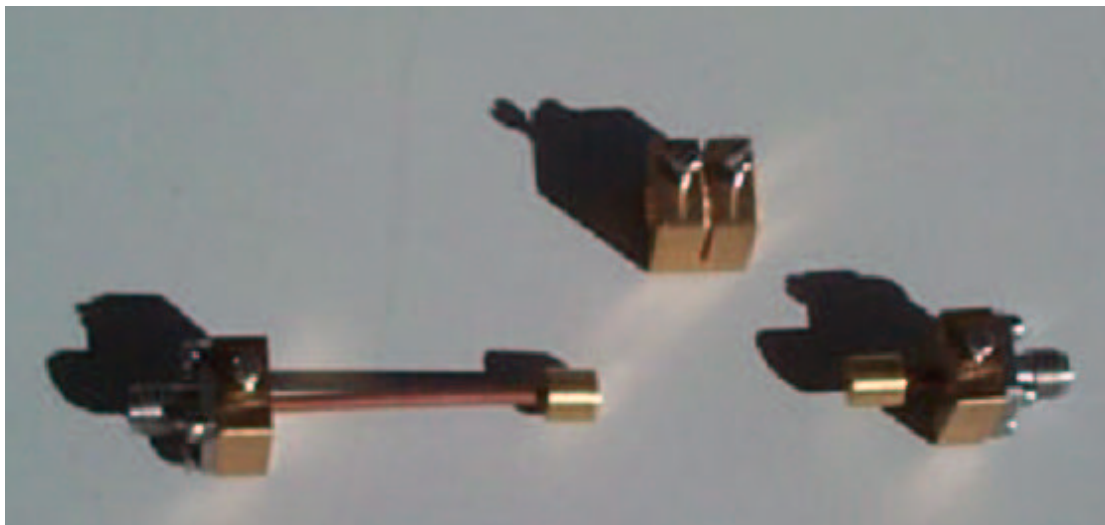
Conductive elastomer test setup: Fixture block with probes engaged
